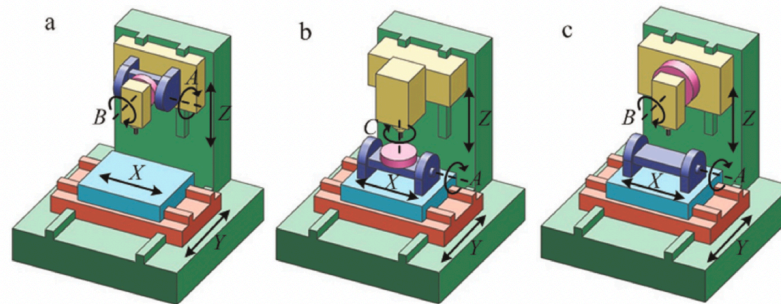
Kinematics configurations for 3+2 axis mechanism: (A) head-head; (B) table-table; and (C) head-table [59].
